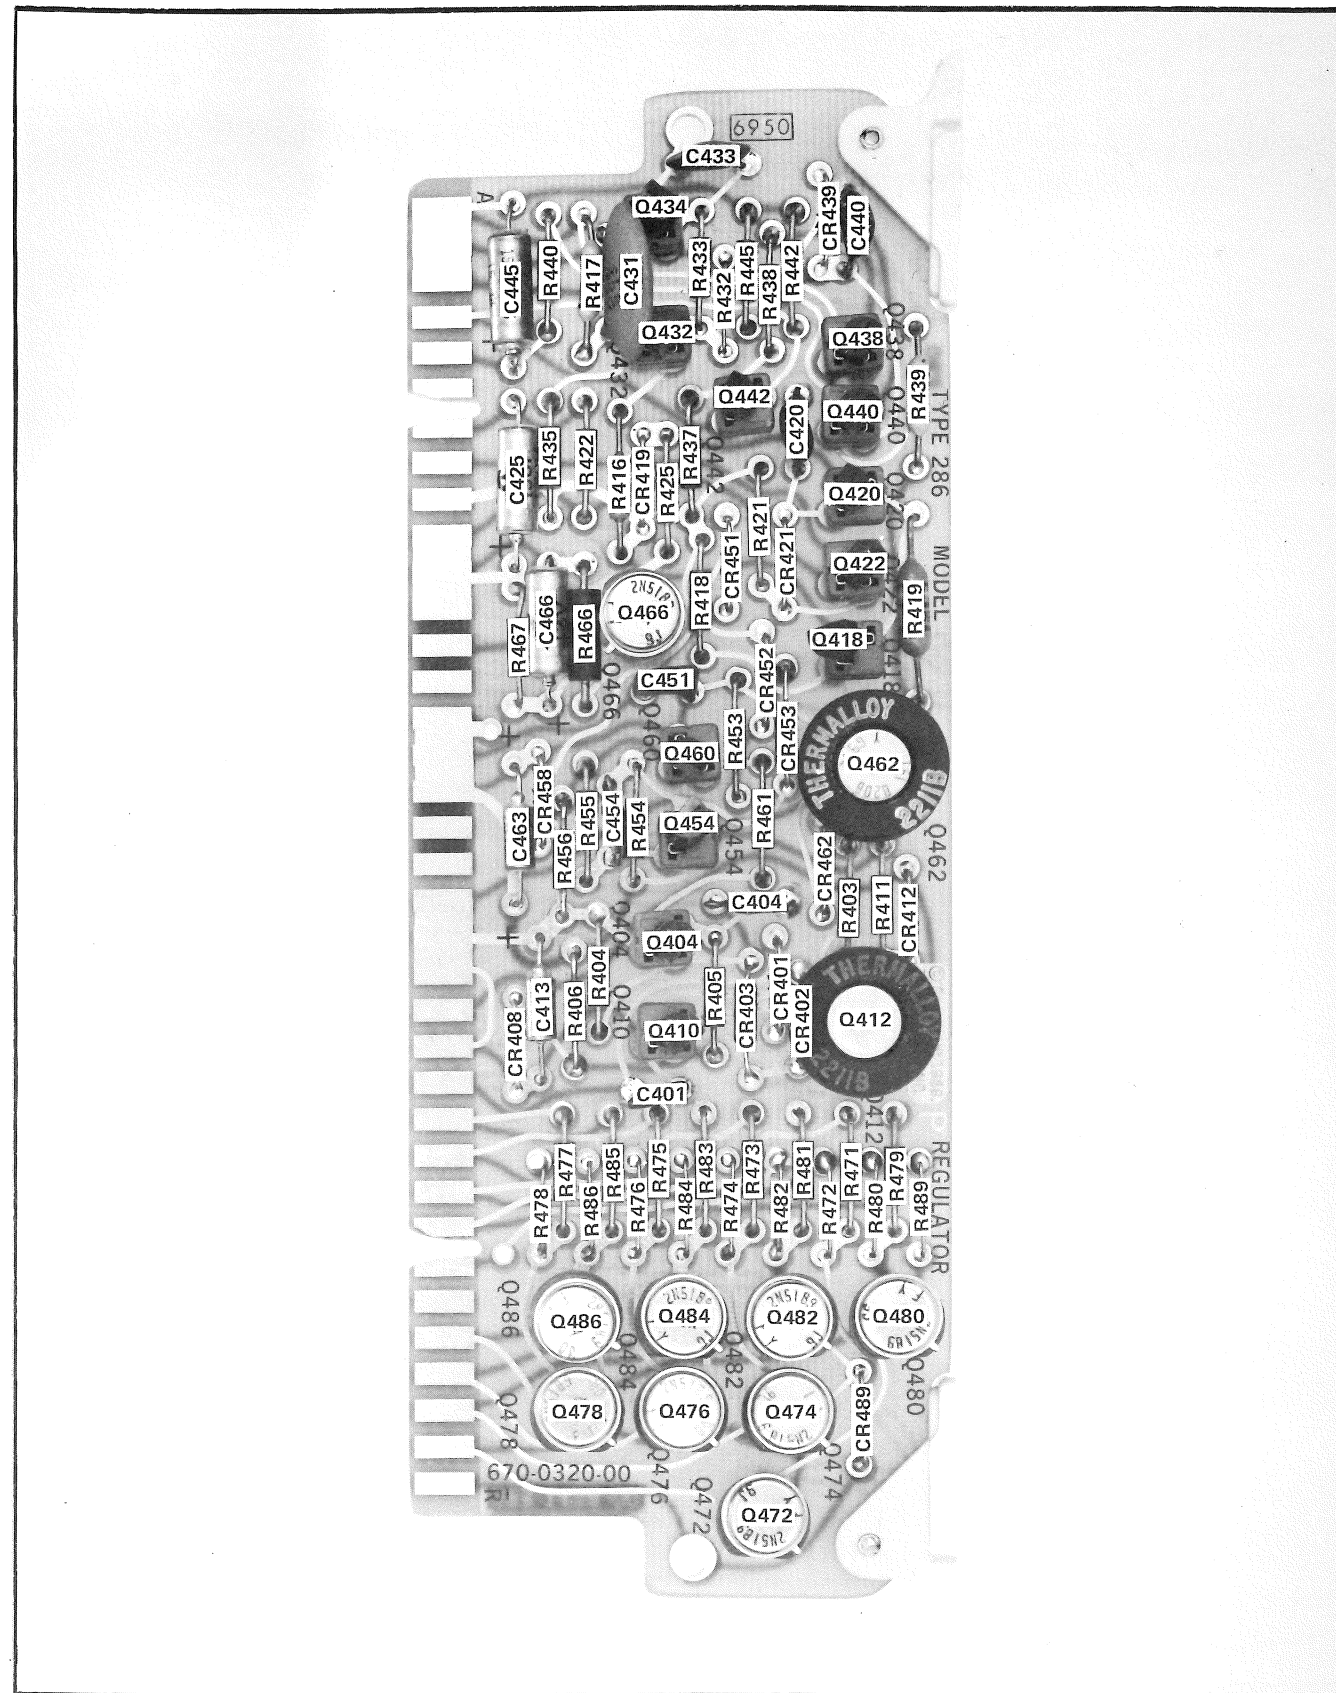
Component locations on Type 286 P90 Regulator circuit card, Model 1-up.
